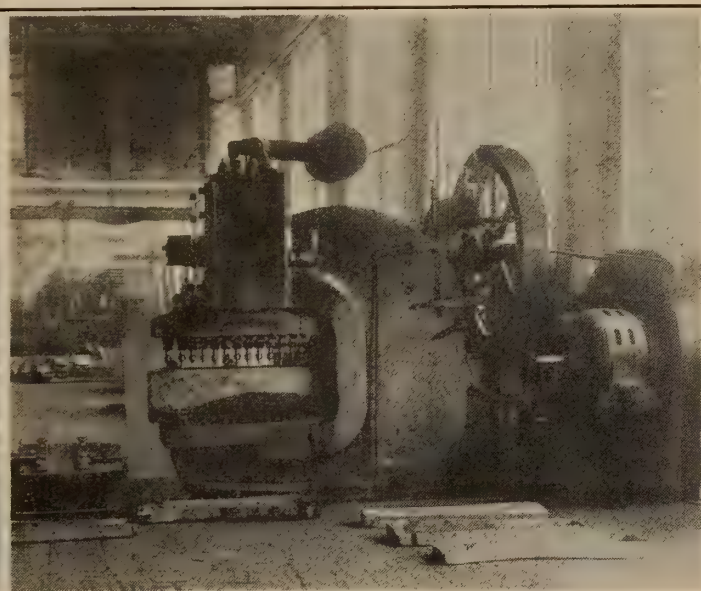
Coping punch for machine bolster, cover plates and diaphragms.
